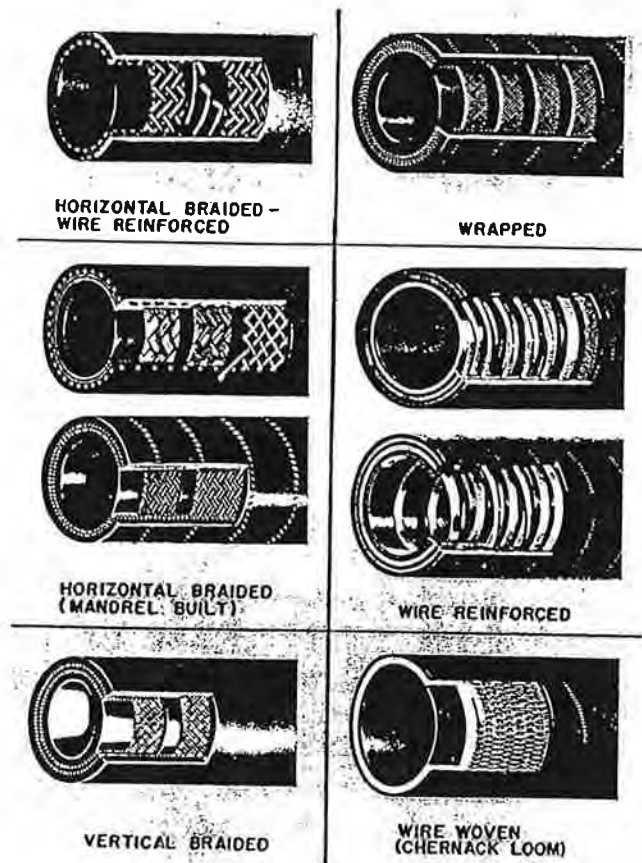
Typical construction of reinforced non-metallic hose.
